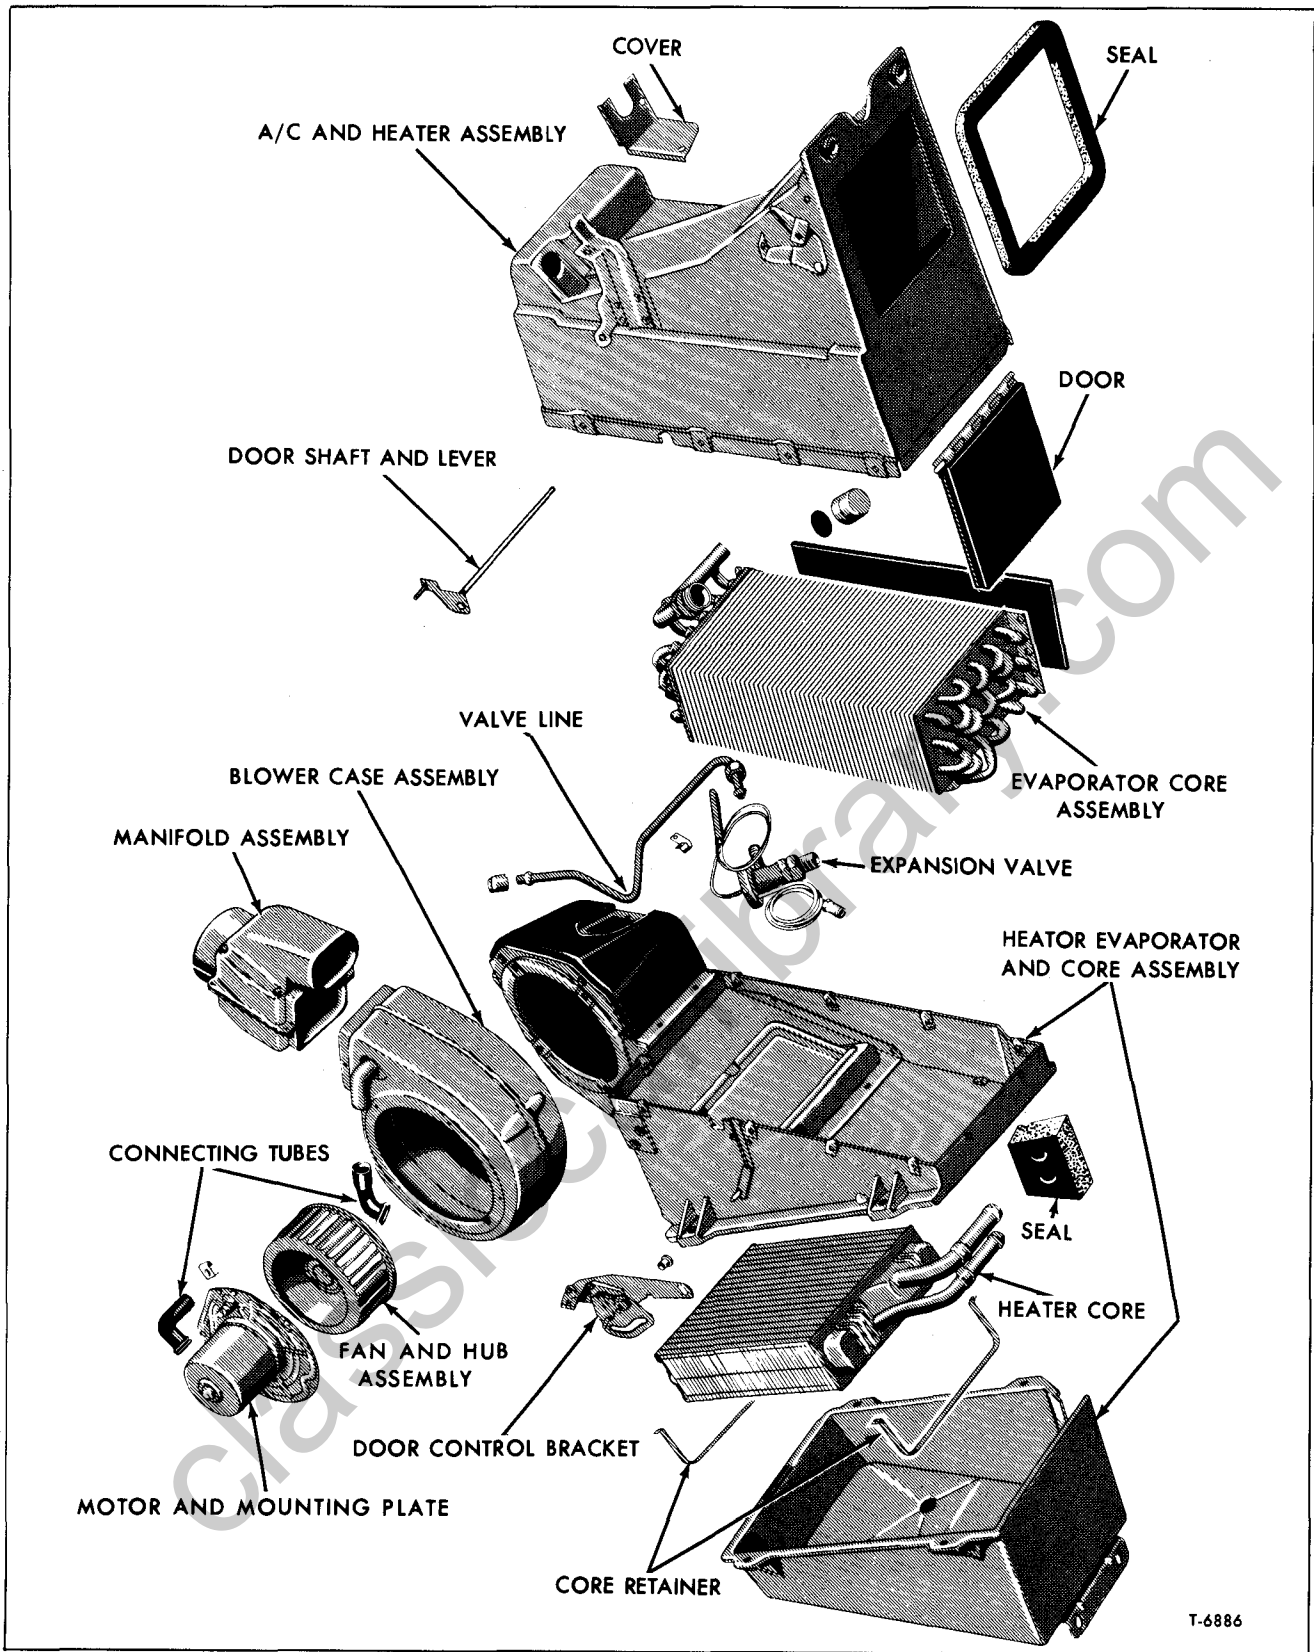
Heater Evaporator Blower (Conventional Cab Model)
